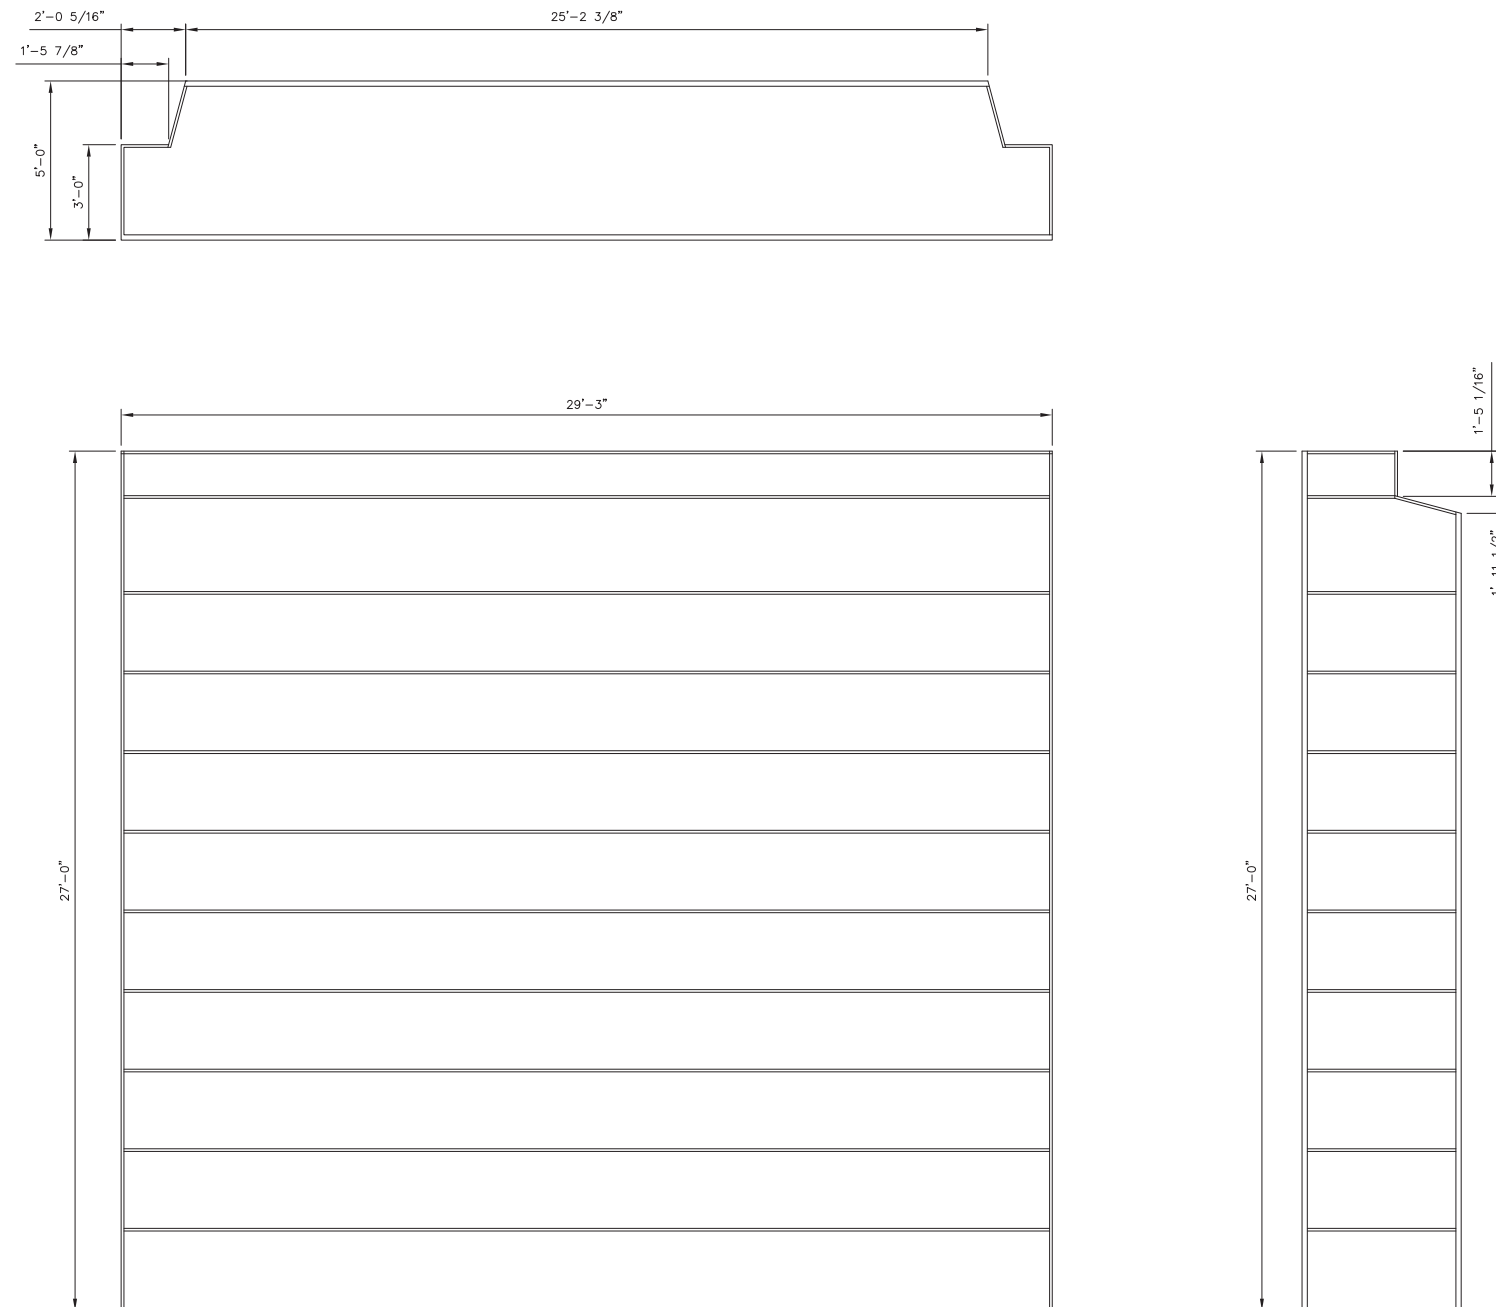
Reactor Building Equipment Door Weldment
